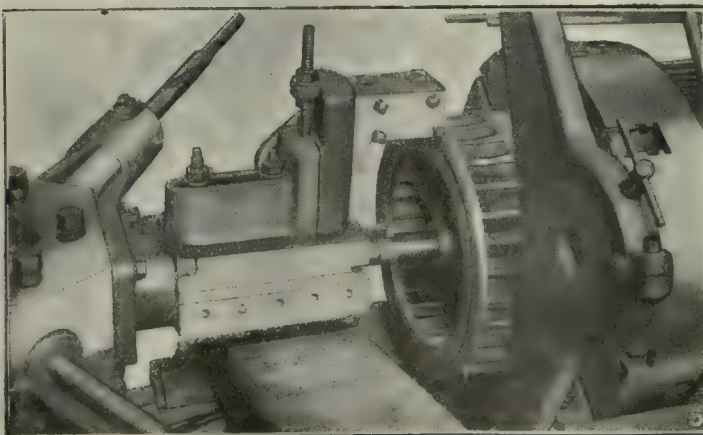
DETAIL VIEW OF FLYWHEEL RIM-TURNING OPERATION
